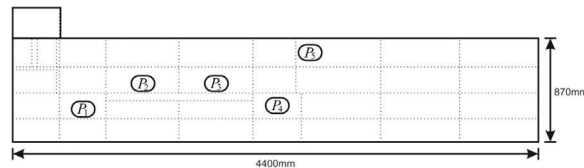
Schematic of wing inspection panels and stiffening elements.
